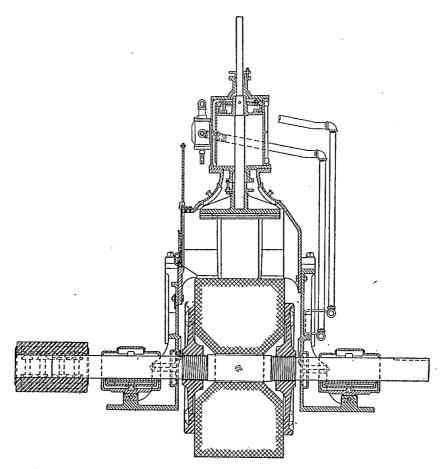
Wood grinder, sectional elevation showing method of securing stone on shafting.
